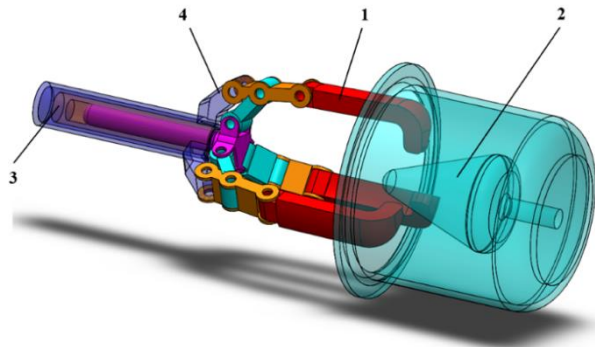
Concept of fingers-like mechanism. Fingers (1), passive interface (2), linear actuator (3), fixed external frame (4).
